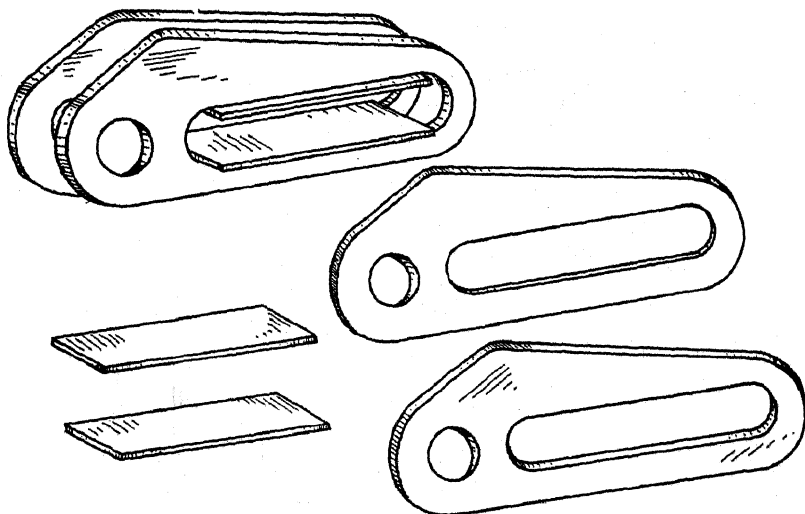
A combination slide and lever of simple construction. An operating pin between the plates transmits a load to the lever which in turn transmits it to a shaft which is placed through the round holes.
